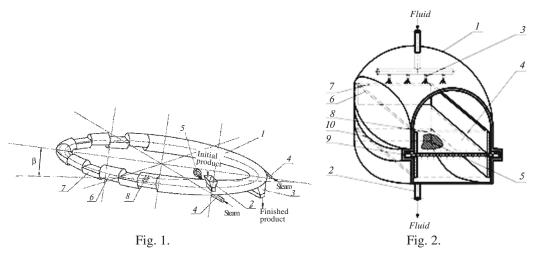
Scheme of the toroidal apparatus: 1 - housing; 2 - loading bin; 3 - unloading bin; 4 - conduits; 5 - adjustable drive; 6, 7 - upper and lower sectors, respectively; 8 - sections.
